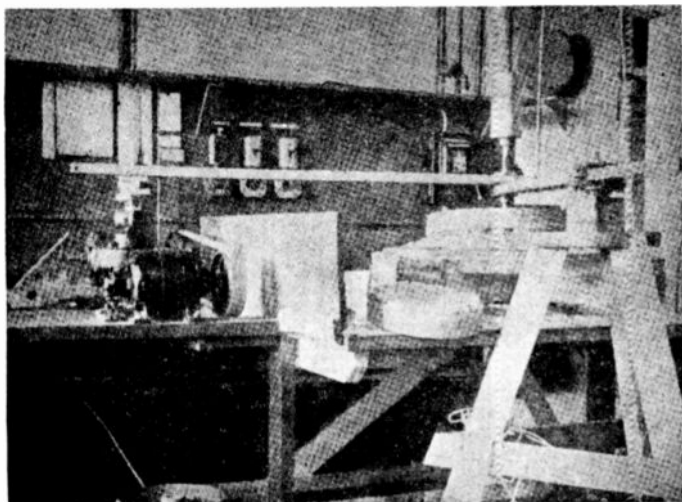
Machine for grinding and polishing glass covers for 31-inch TCR tube.
